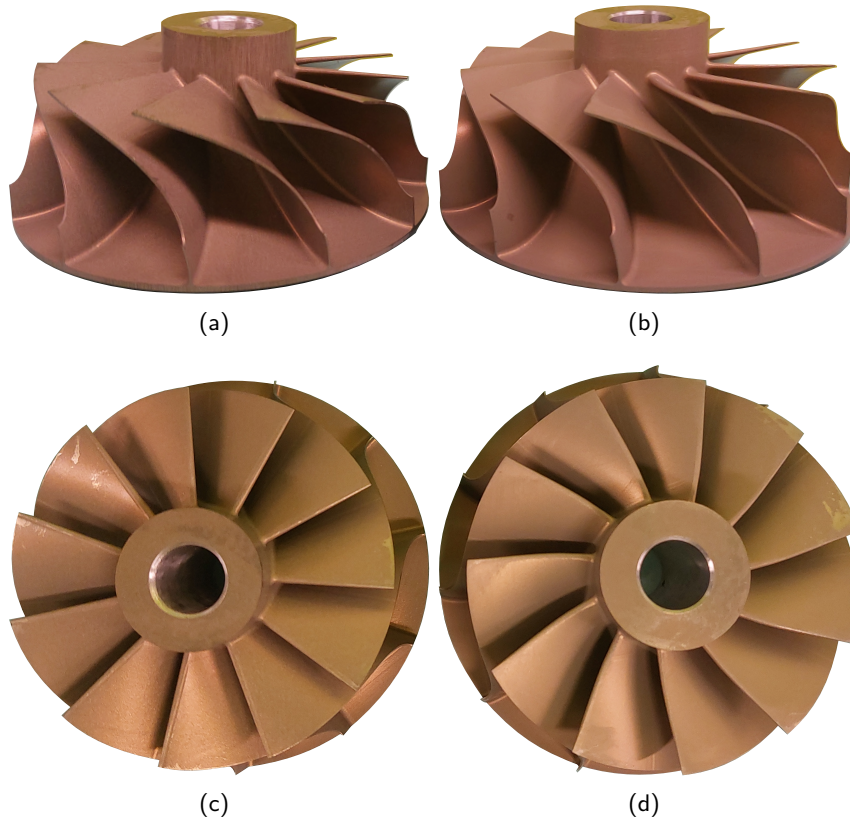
Manufactured rotor wheels: (a) front view and (c) top view of the radial fibre rotor and (b) front view and top view (d) of the non-radial fibre rotor
